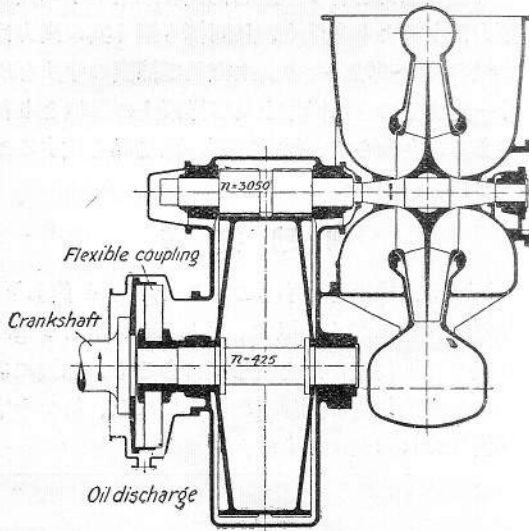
Sectional Elevation of One of the Four Scavenging Blowers.
